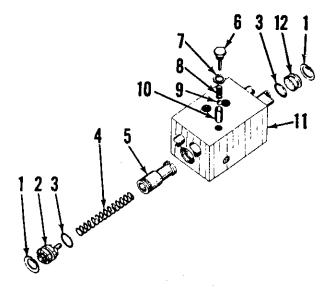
Exploded view of early Series B-414 flow control and relief valve assembly used with single stage pump.
